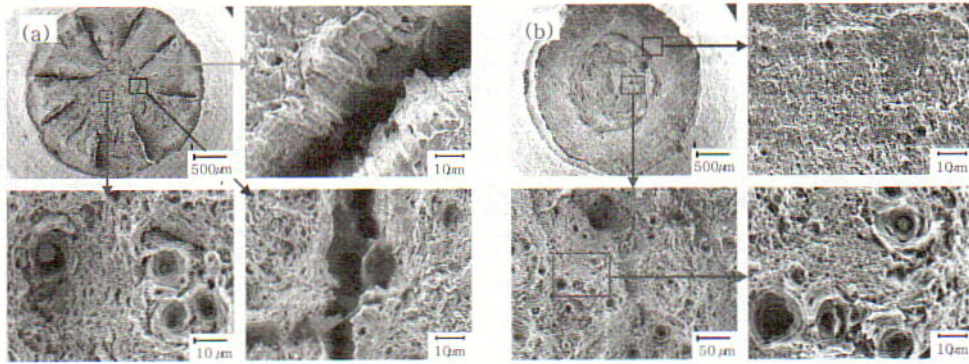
Fracture surface of tensile test. (a): ML, R.T. and (b): ML, 400 °C
